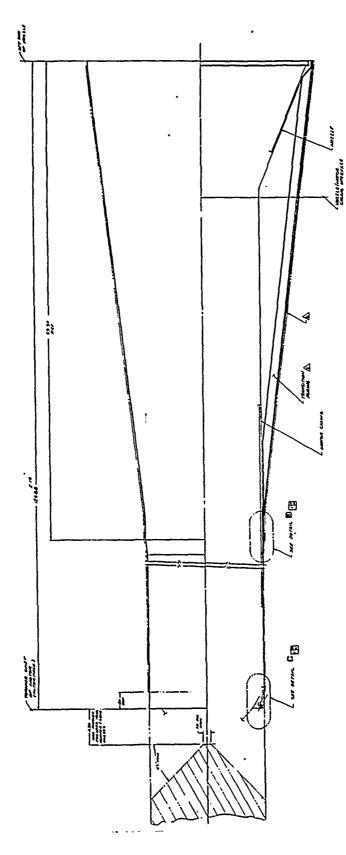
Motor Assembly/Transition Faring -Super FLAME Second Stage
